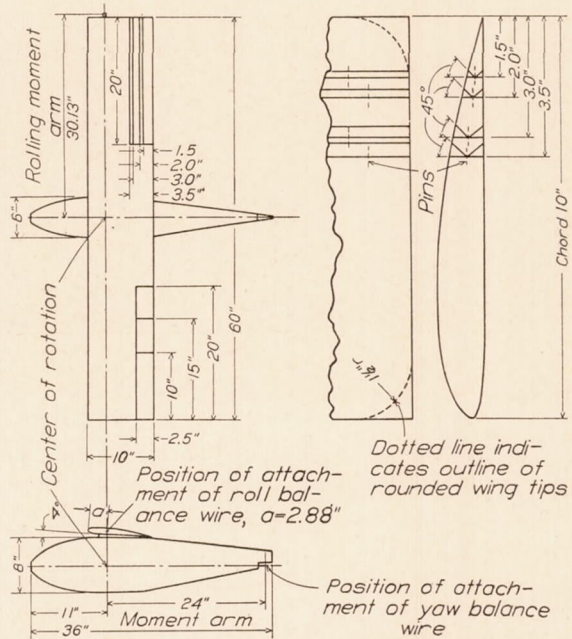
Varying aileron chord end of wing, Clark Y section, showing method of hinging ailerons. U. S. A. 27 similarly constructed
